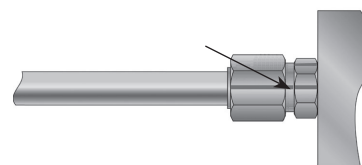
For initial assembly only, tighten by number of flats recommended in Table R22. Make a second reference mark on fitting body, lined up with mark on nut; 1 FFWR shown. See page R25 for reassembly procedure.
